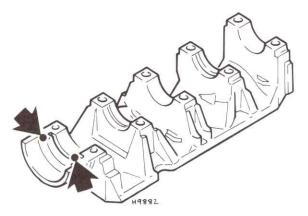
Apply sealant to arrowed areas when refitting the main bearing cap (Sec 4)
